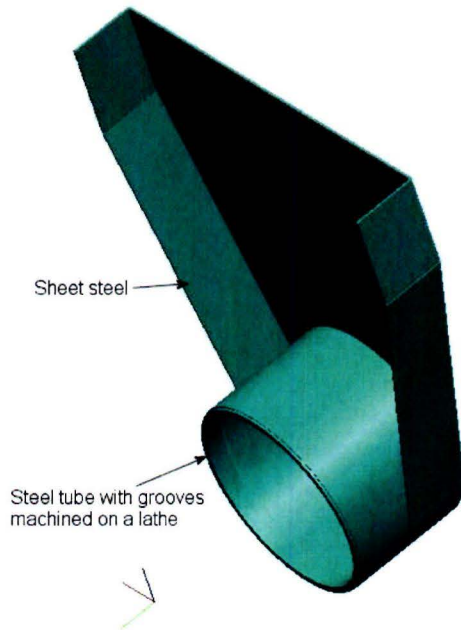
Wheel carrying arm: steel tube with first piece sheet steel
